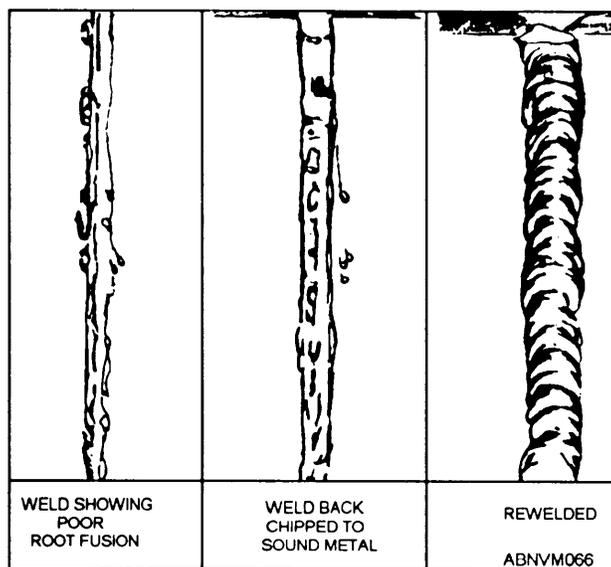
Chipping out the fused back side of a joint to make a high-quality weld.
